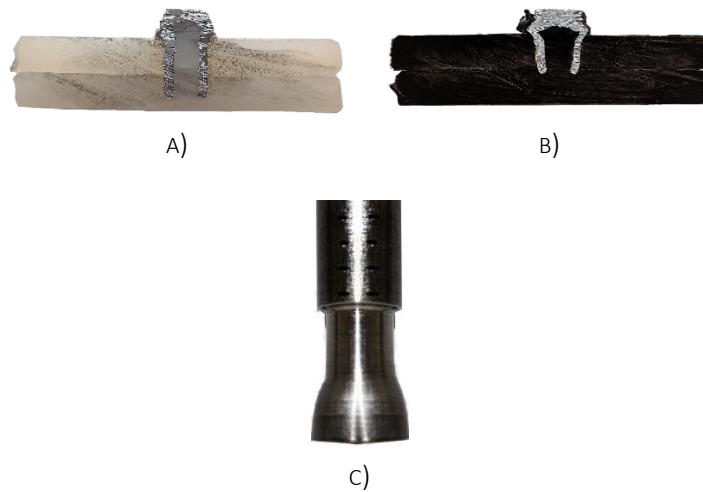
PERFORMED JOINTS USING A) B30S (PA6) AND B) BKV30H (REINFORCED PA6); C) DEFORMED RIVET PULLED OUT BY THE TENSILE TEST
